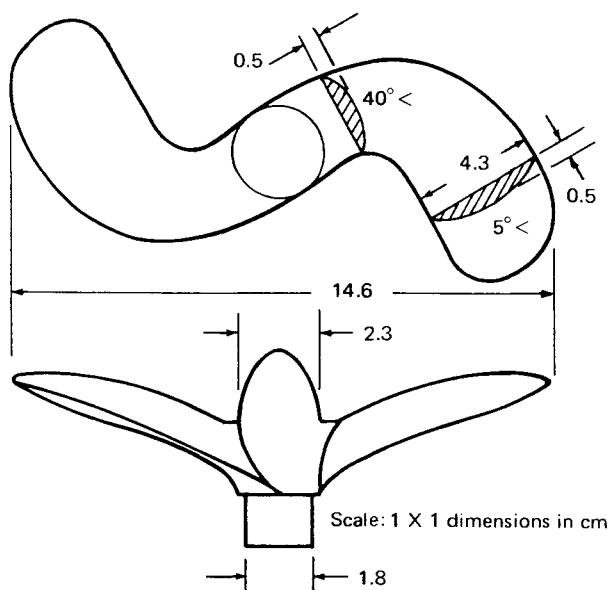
The Shakespeare No. 658P04 outboard trolling propeller.
